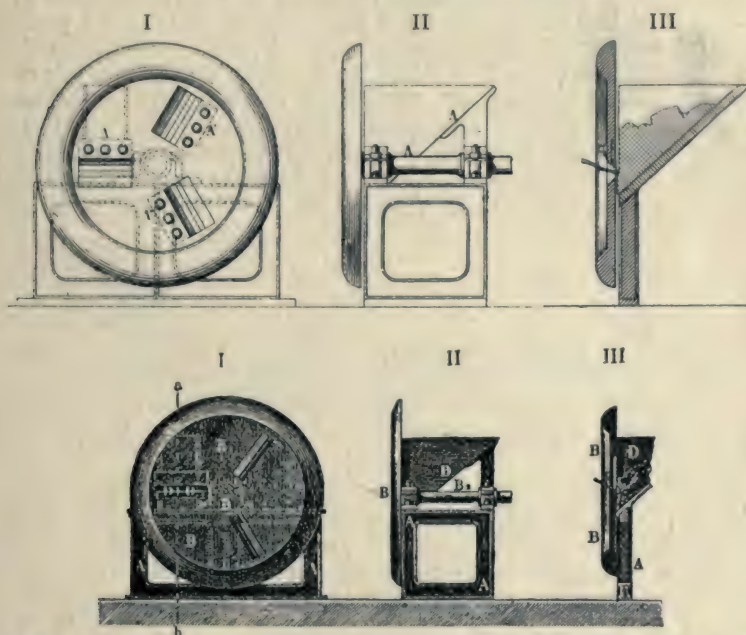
Machine for cutting up raw gutta percha (*slicing machine*) (Hancock's system).
